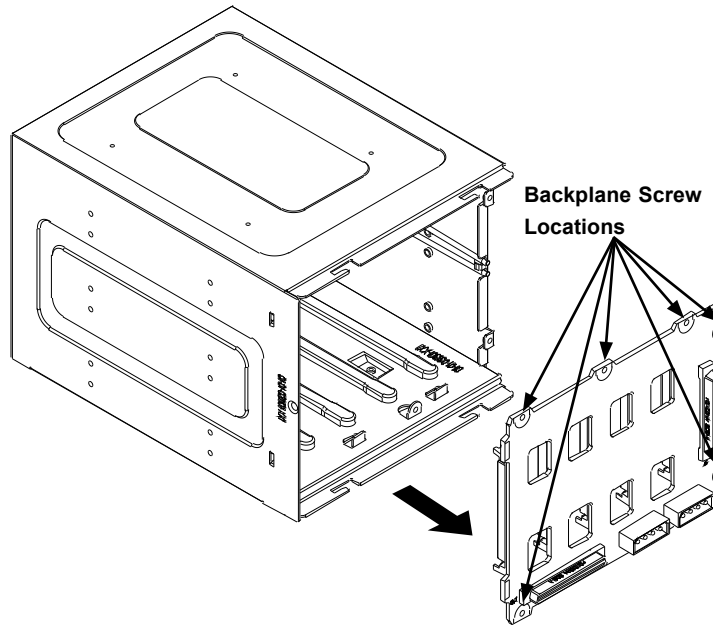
Removing the Mobile Rack Backplane (Optional)
